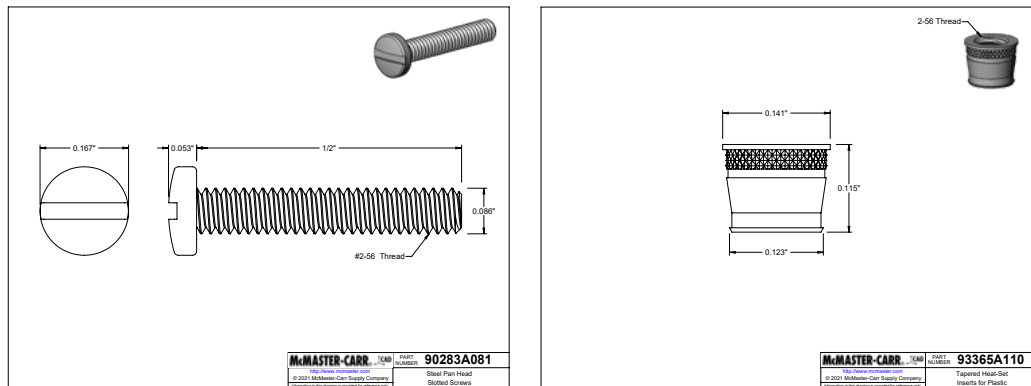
Screw and Heat-Set Inserts to Mount PCB and Secure Battery Door
